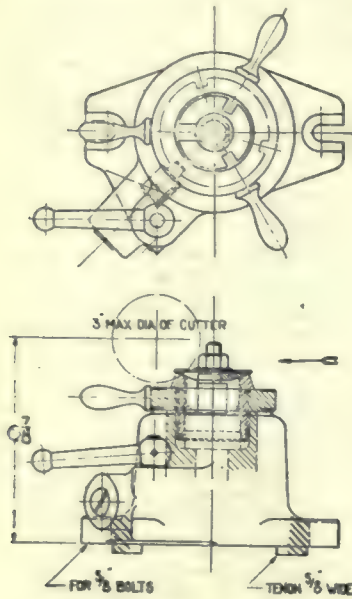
TYPE "A" FIXTURE FOR 4.5 IN. SHELLS.
